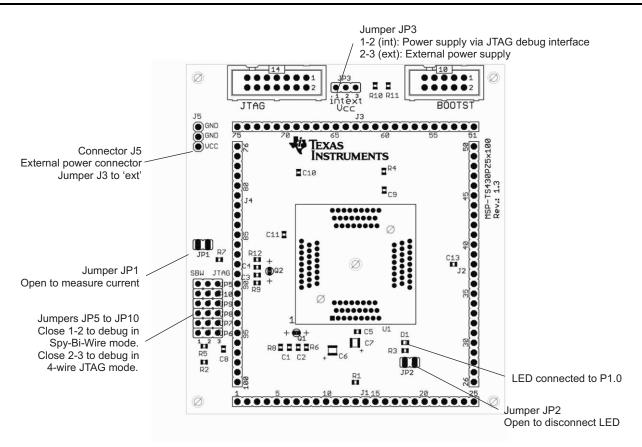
MSP-TS430PZ5x100 Target Socket Module, PCB
